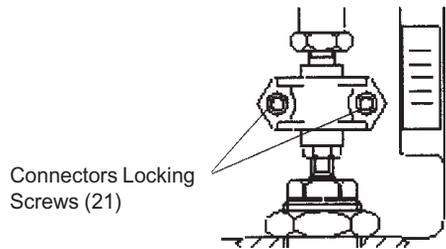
Assembly of Actuator Adaptor, Valve Adaptor and Connectors
